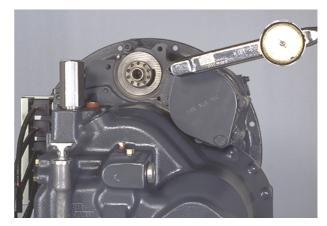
Using a special tool tighten sleeve to 45-50 lbf.ft [61.1-67.7 N.m].
